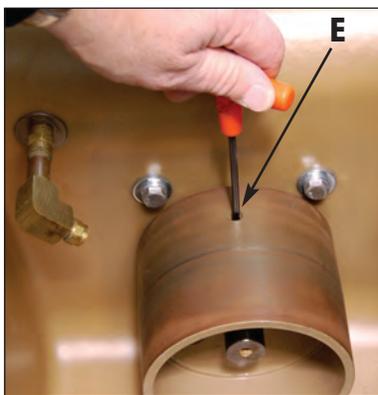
Loosen two set screws on the Lower Pulley with a 5/32" Hex/Allen wrench. Holes in the Pulley "E" line up with the two set screws.
